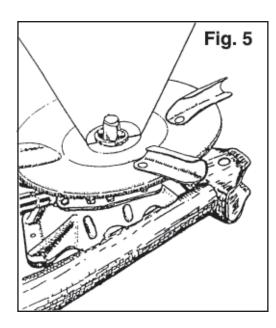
Partially install pin into disc before assembling to gearbox shaft. Insert the spinner disc onto the driven output shaft, and align holes and drive in the roll pin "a", which is lower hole. Drive roll pin in until flush with bushing.
